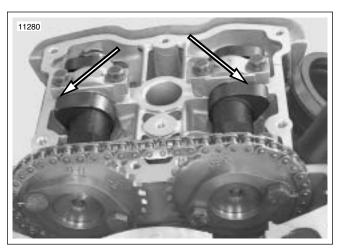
Front Cylinder 10 and 2 O'clock Cam Lobe Position
